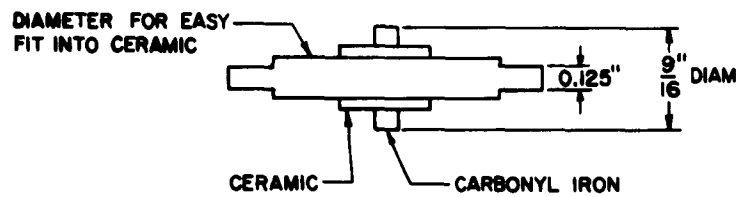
CERAMIC INSULATOR ASSEMBLY
